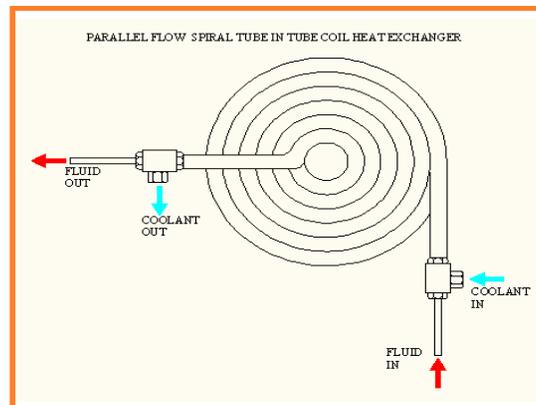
Arrangement of the Spiral tube in tube heat exchanger in parallel flow configuration
